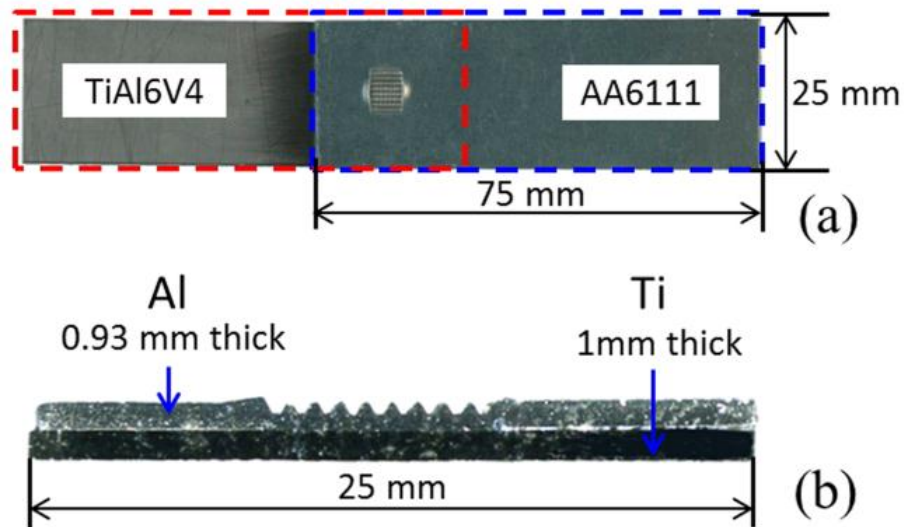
(a) Weld appearance of a typical rectangular-tip weld, welding time 0.6 s, welding energy 956J, (b) Macrostructure of cross-section of a typical rectangular-tip weld, welding time 1.2 s, welding energy 1735J.
